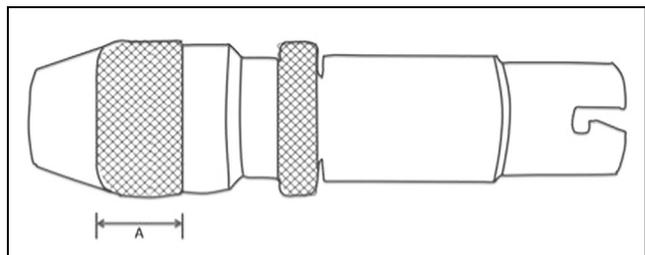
Power drill chuck: section A is used for smoothing the cut surface of the rod.
